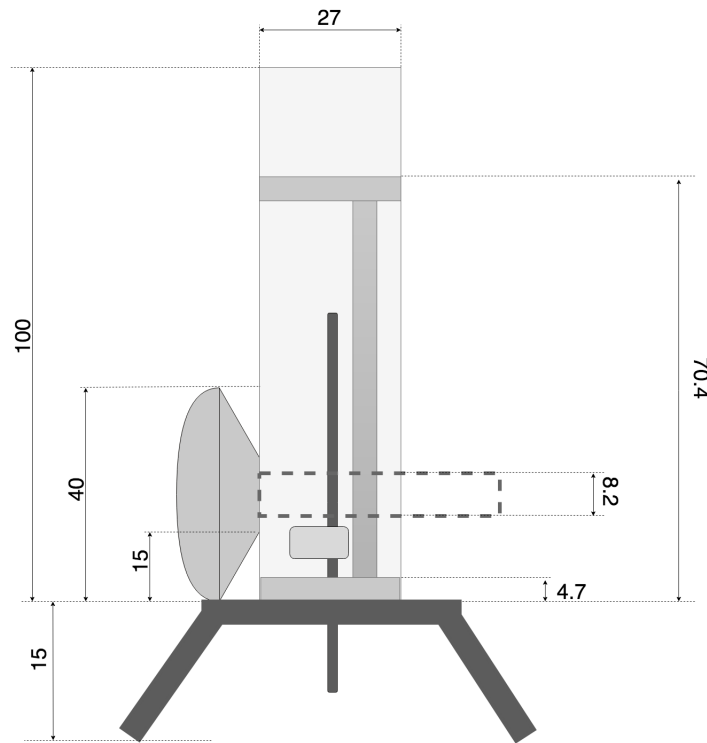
Drill tower dimensions in [cm]. The dotted line represents the sampling pushing mechanism.
